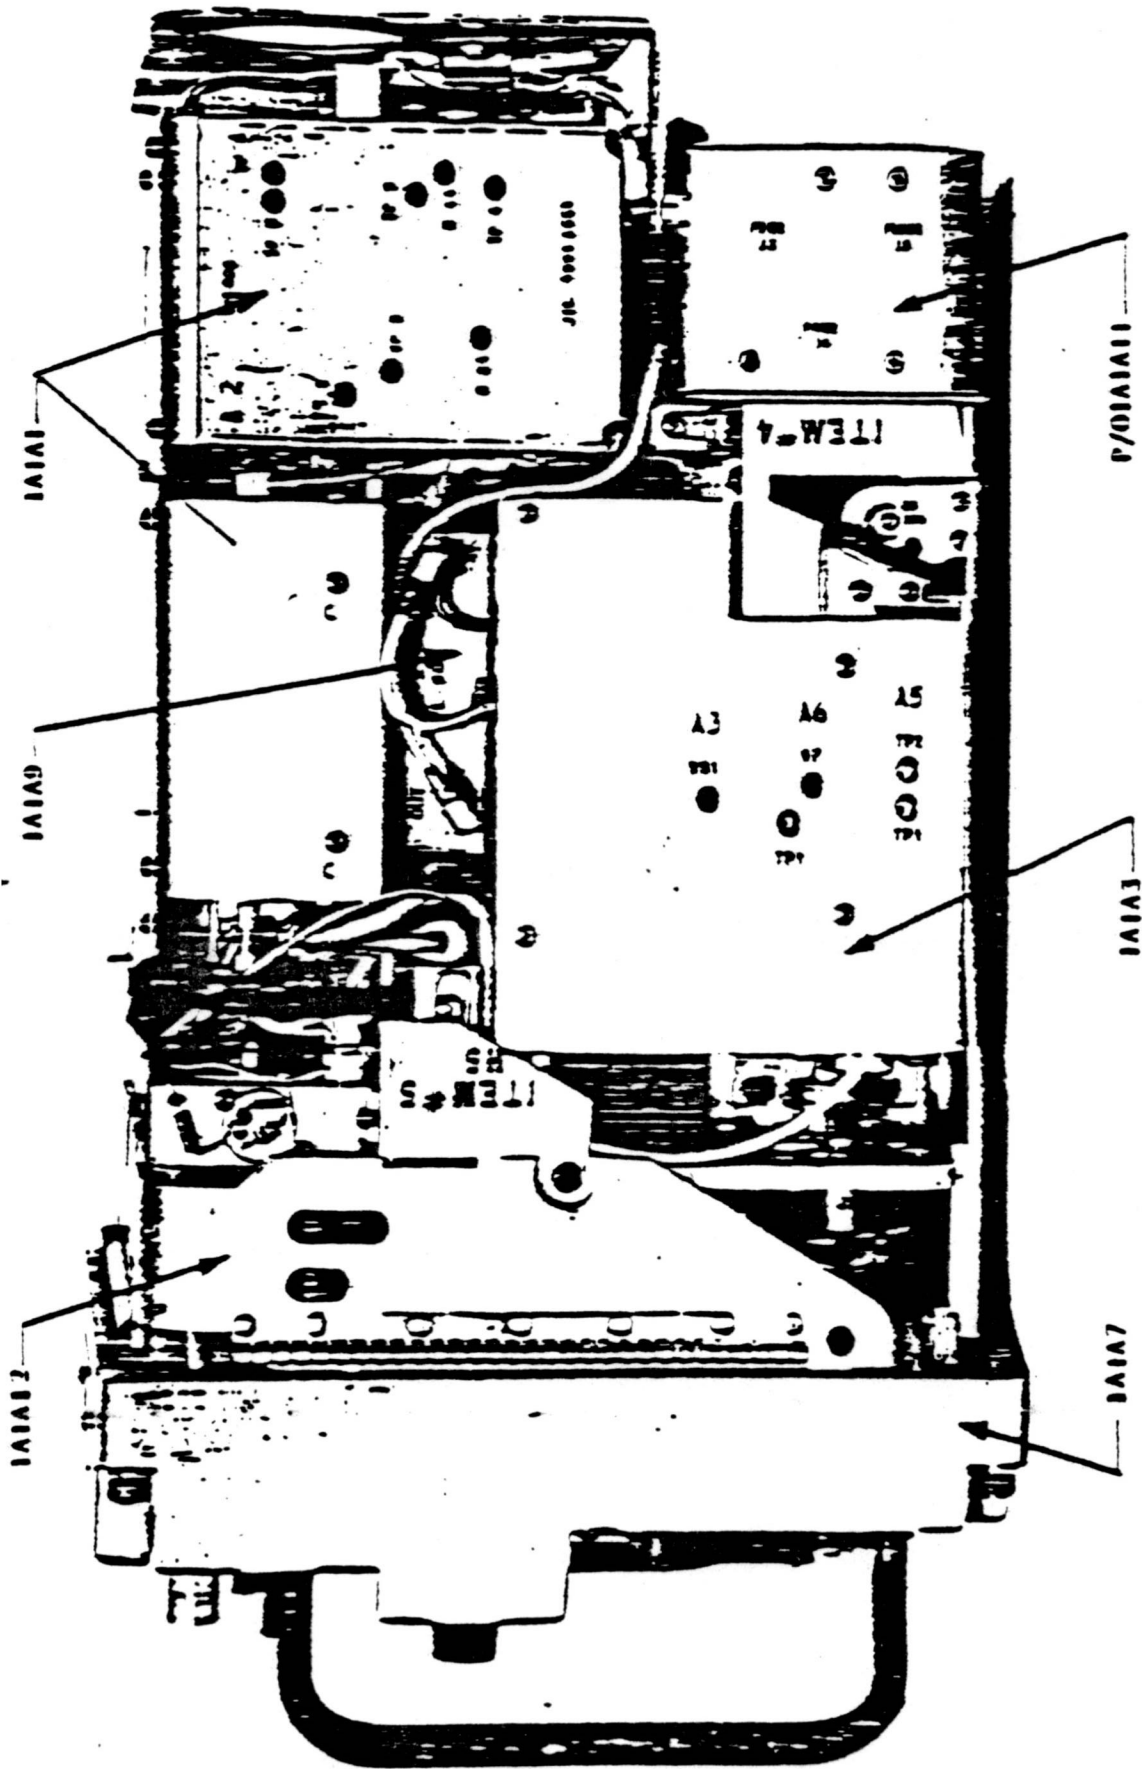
RF Unit Assembly Locations (Sheet 2 of 5)
